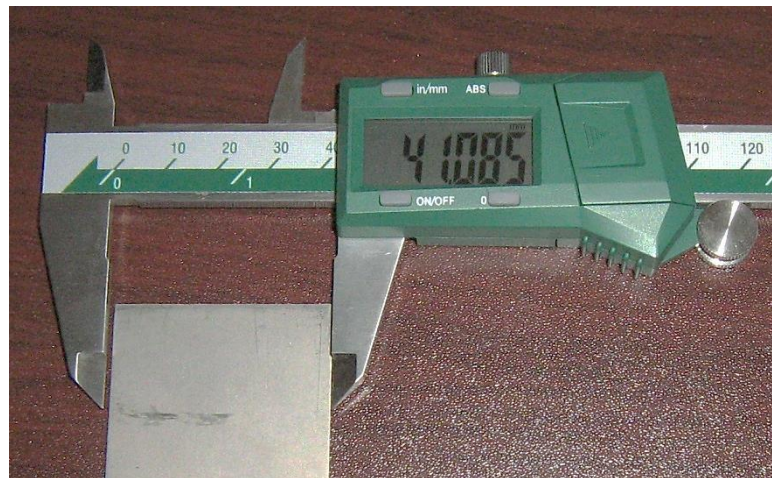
Measurement of samples' dimensions with a Vernier caliper
